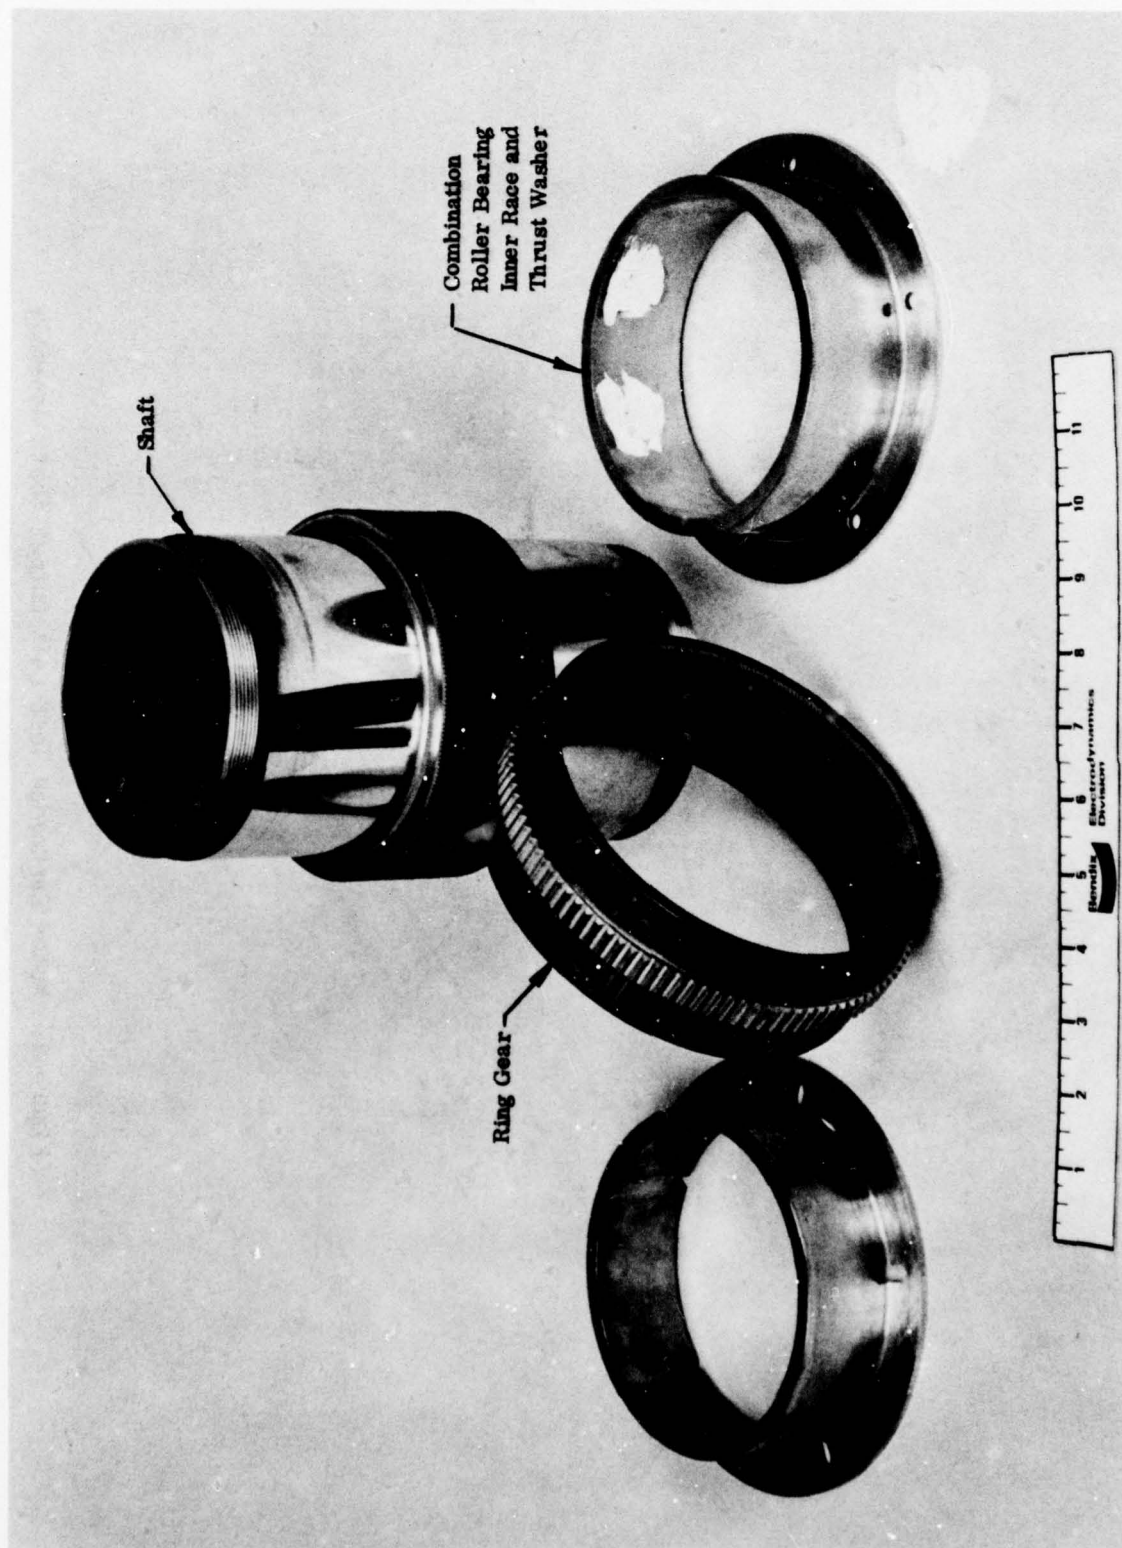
Prototype Actuator Model HL-043-U1 Transmission Components
